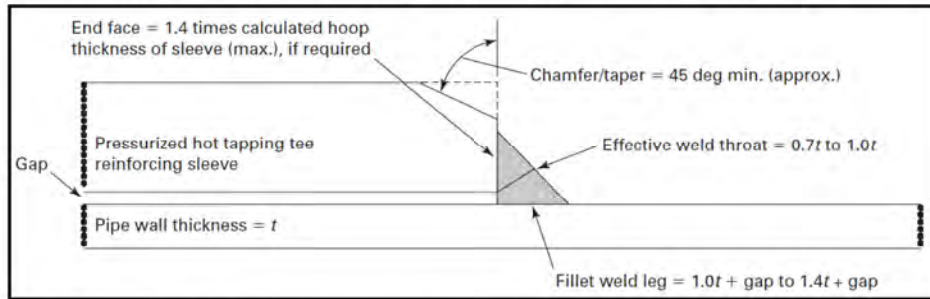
Fillet Weld Size Requirements for Hot-tap Reinforcement Connections and Type B Reinforcement Sleeves
